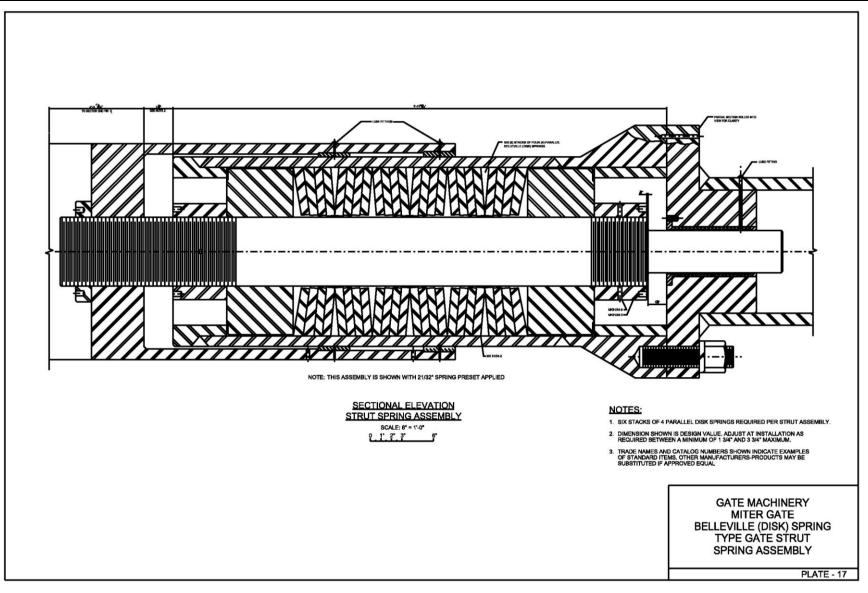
Plate 17: Gate machinery, miter gate, Belleville (disk) spring type gate strut spring assembly
